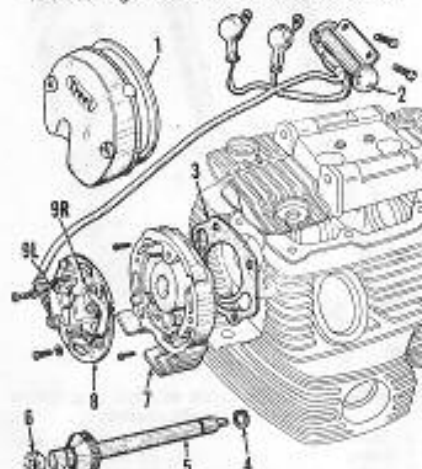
Exploded view of Type I ignition breaker points assembly. The automatic ignition advance mechanism is between the valve camshafts.
